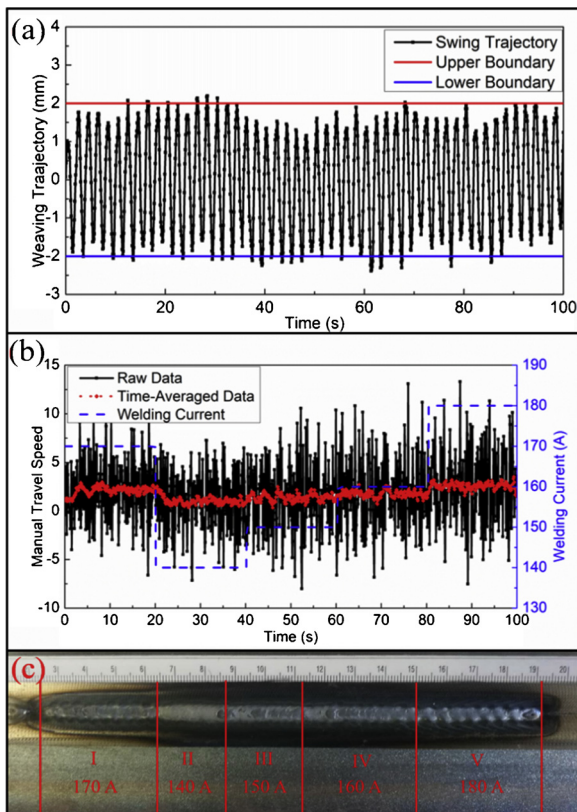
Manual welding (a) weaving trajectory (b) travel speed demonstrated (c) welded workpiece.
